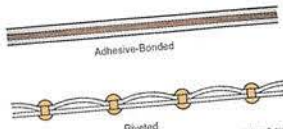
On parts joined with an adhesive, the mating surfaces are in continuous contact.
